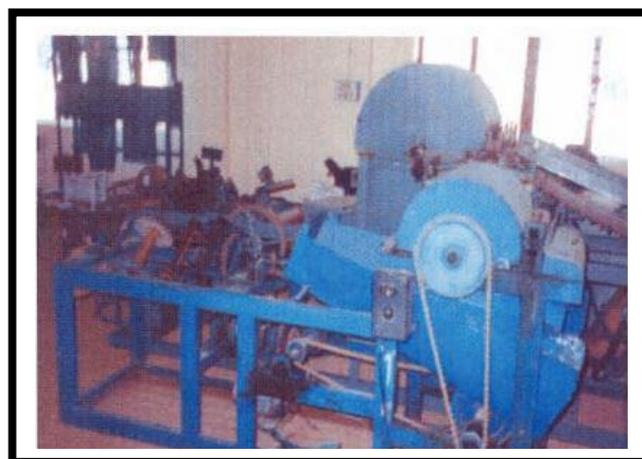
Flax Scutcher Plate 2.14 : Hackling machine
